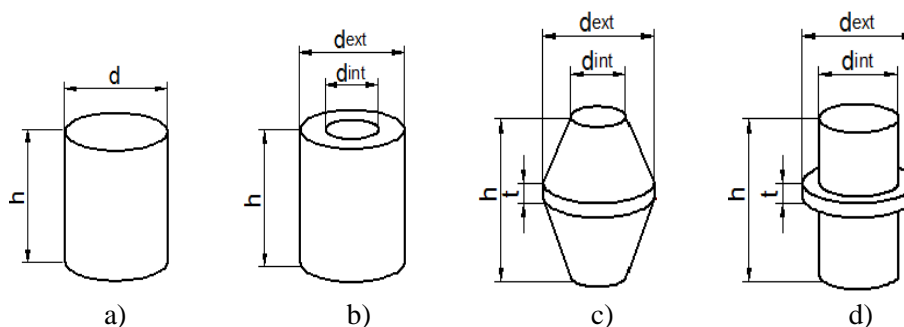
Tested models for upsetting: a) cylinder, b) hollow cylinder, c) tapered specimen, d) cylinder with flanged [20-21]
